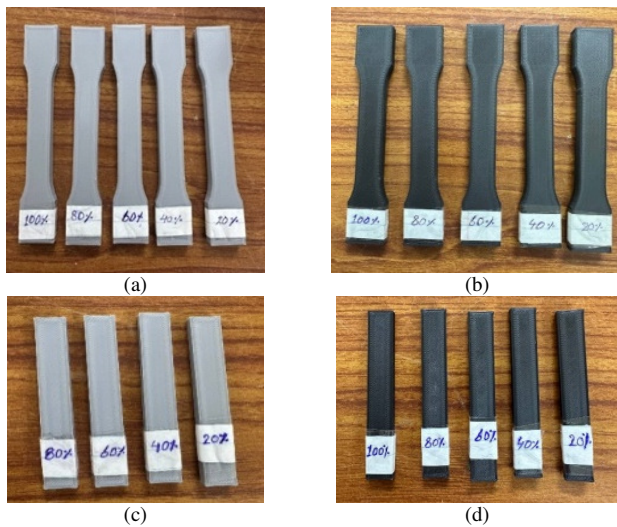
Test samples: (a) PLA tensile specimen, (b) PLA-CF tensile specimen, (c) PLA impact specimen, (d) PLA-CF impact specimen.
